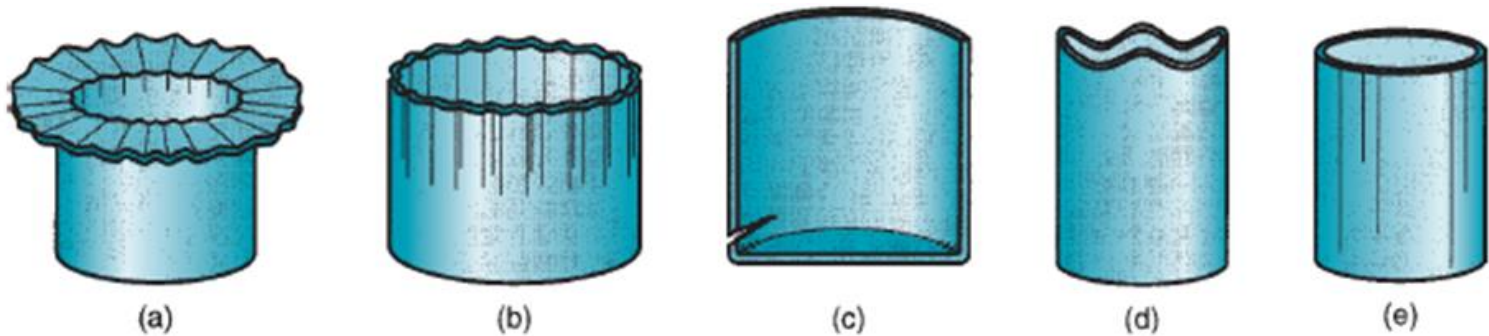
Common defects in drawn parts: (a) wrinkling can occur either in the flange or (b) in the wall, (c) tearing, (d) earring, and (e) surface scratches.
